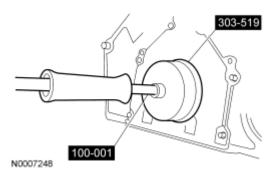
Removing Crankshaft Rear Oil Seal Slinger Courtesy of FORD MOTOR CO.
